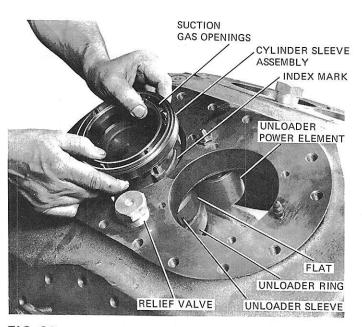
REMOVING CYLINDER & UNLOADER SLEEVES
